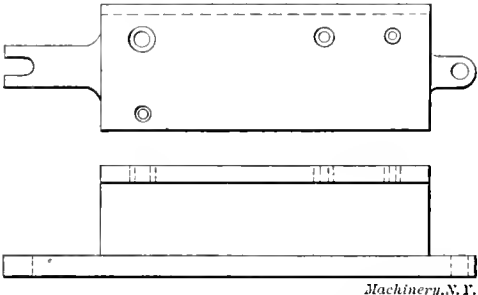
Outline of Jig for which Jig Plate in Fig. 2 is used.
